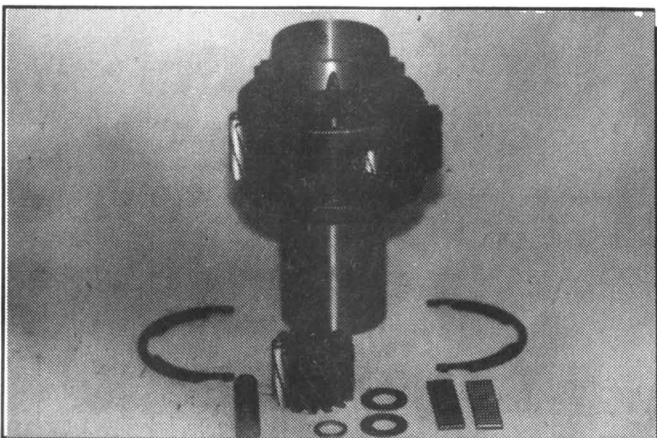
The needle rollers, spacer & thrust washers are assembled as shown. Assemble the planetary assembly in reverse order of disassembly. Lubricate the internal parts liberally with SAE 90 gear oil.
